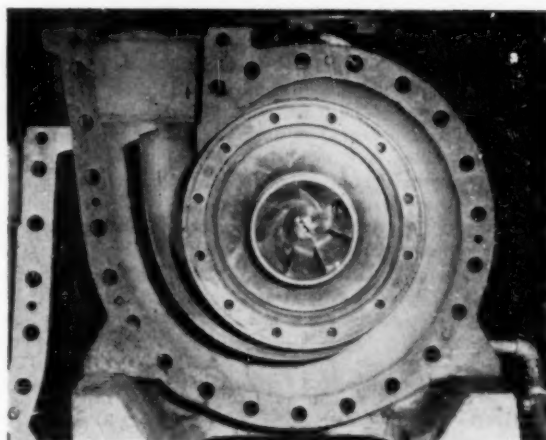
GRAND COULEE MODEL PUMP WITH HALF OF CASING REMOVED SHOWING IMPELLER, DIFFUSER RING, AND SEPARATING RIB
